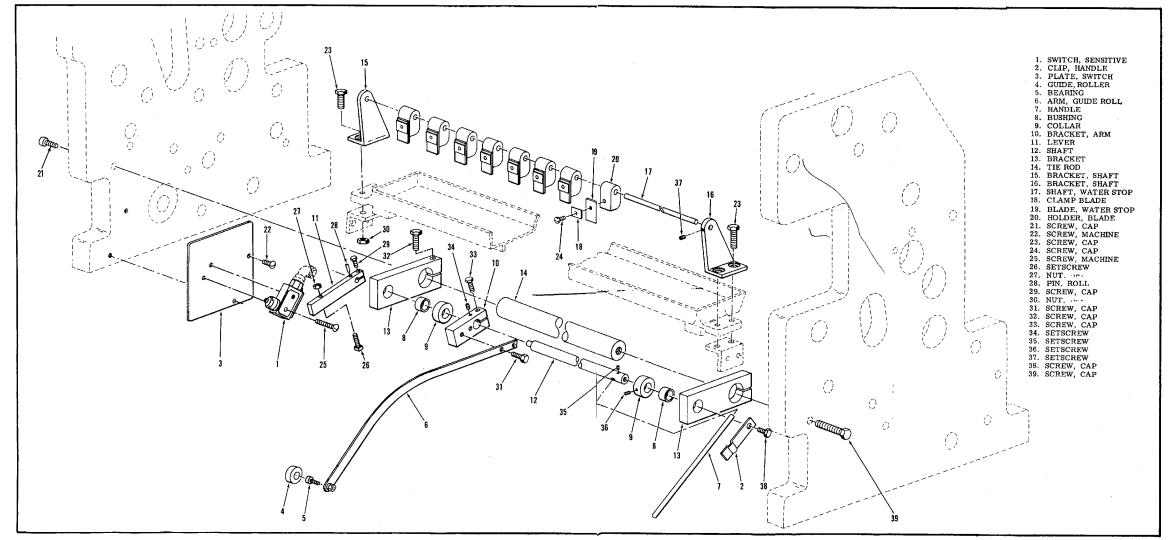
Paper roll stop switch and water stop assembly, exploded view.
